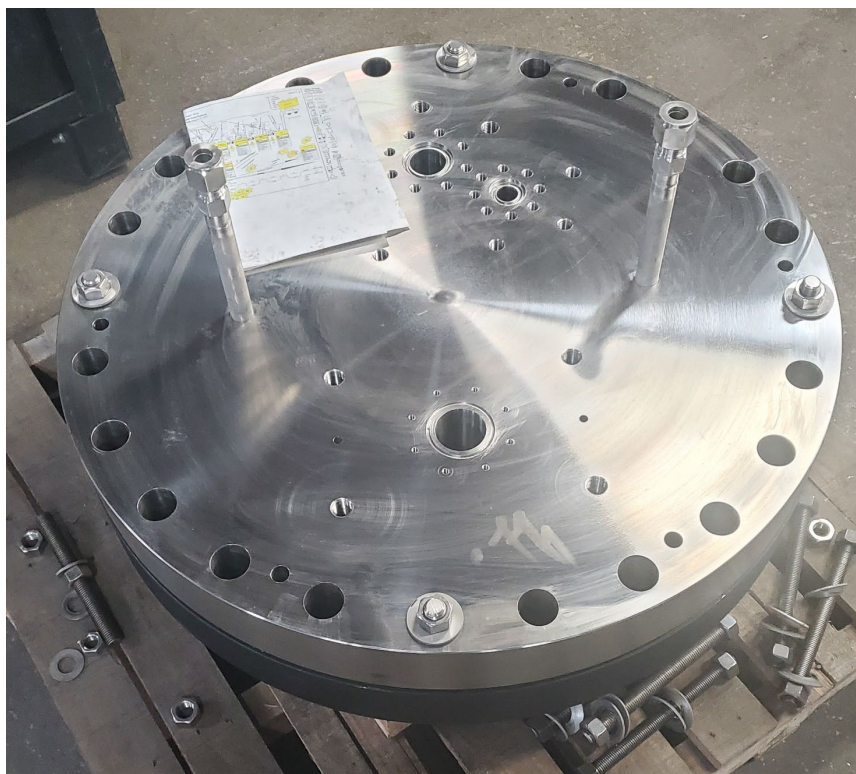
Main flange weldment following inspection and leak check at the manufacturer.
